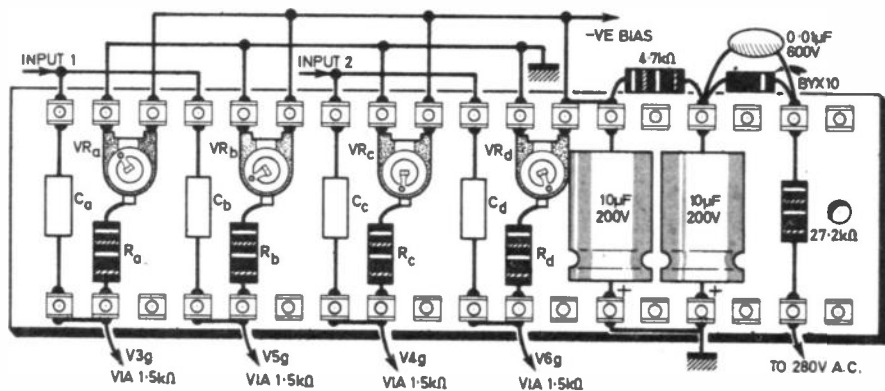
Layout of the components on a piece of miniature tagboard for supply of adjustable negative bias to the four valves. Strip also holds components in dotted box of Fig. 2.
